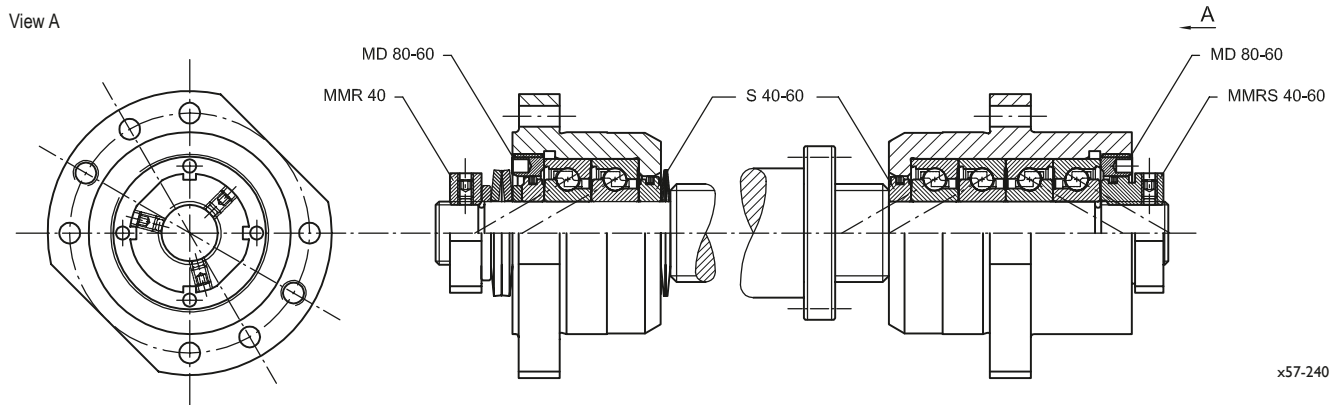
Ball screw with bearings on both sides, preloaded by springs, with labyrinth seals and radially locking precision locknuts
